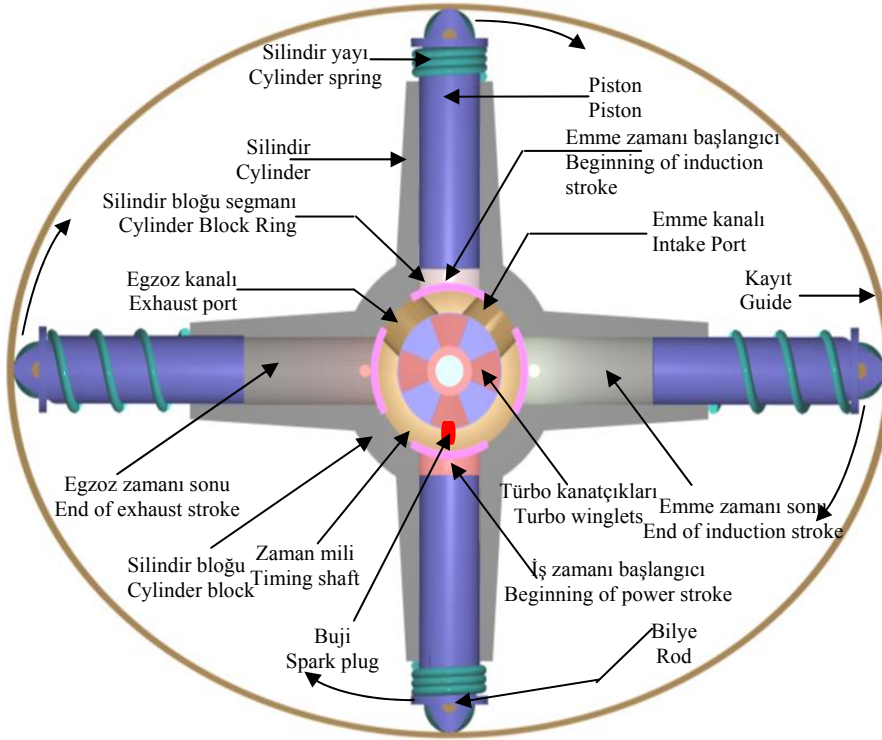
Timing shaft and parts of the Elliptic Engine
